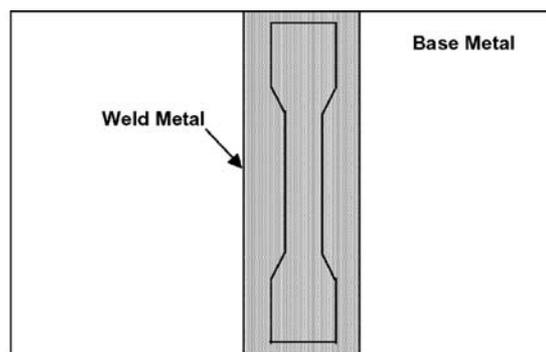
Schematic drawing of groove weld test pad for tension test specimen.
